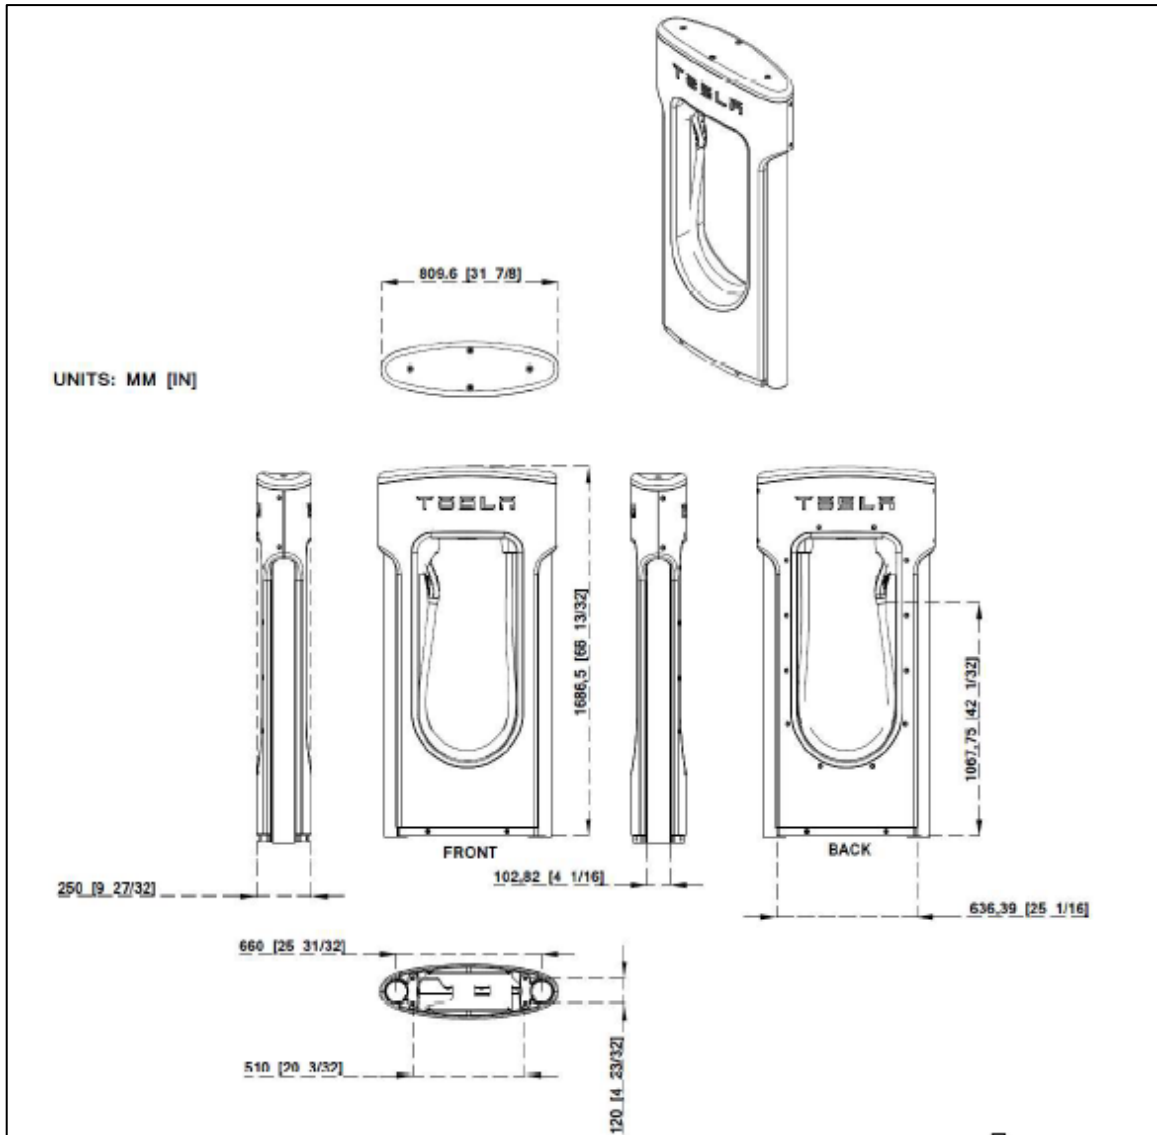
Elevational Drawings of Proposed Tesla V3 Superchargers
